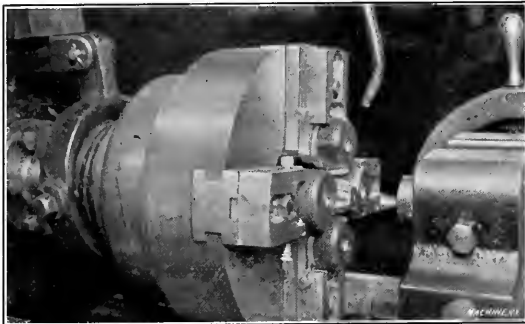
Murchey Pipe Threading Die set up on a Machine
